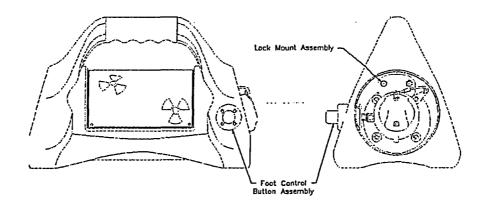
MODEL 880 (Test Unit #21) WITH FOOT BUTTON AND LOCK MOUNT ASSEMBLIES
